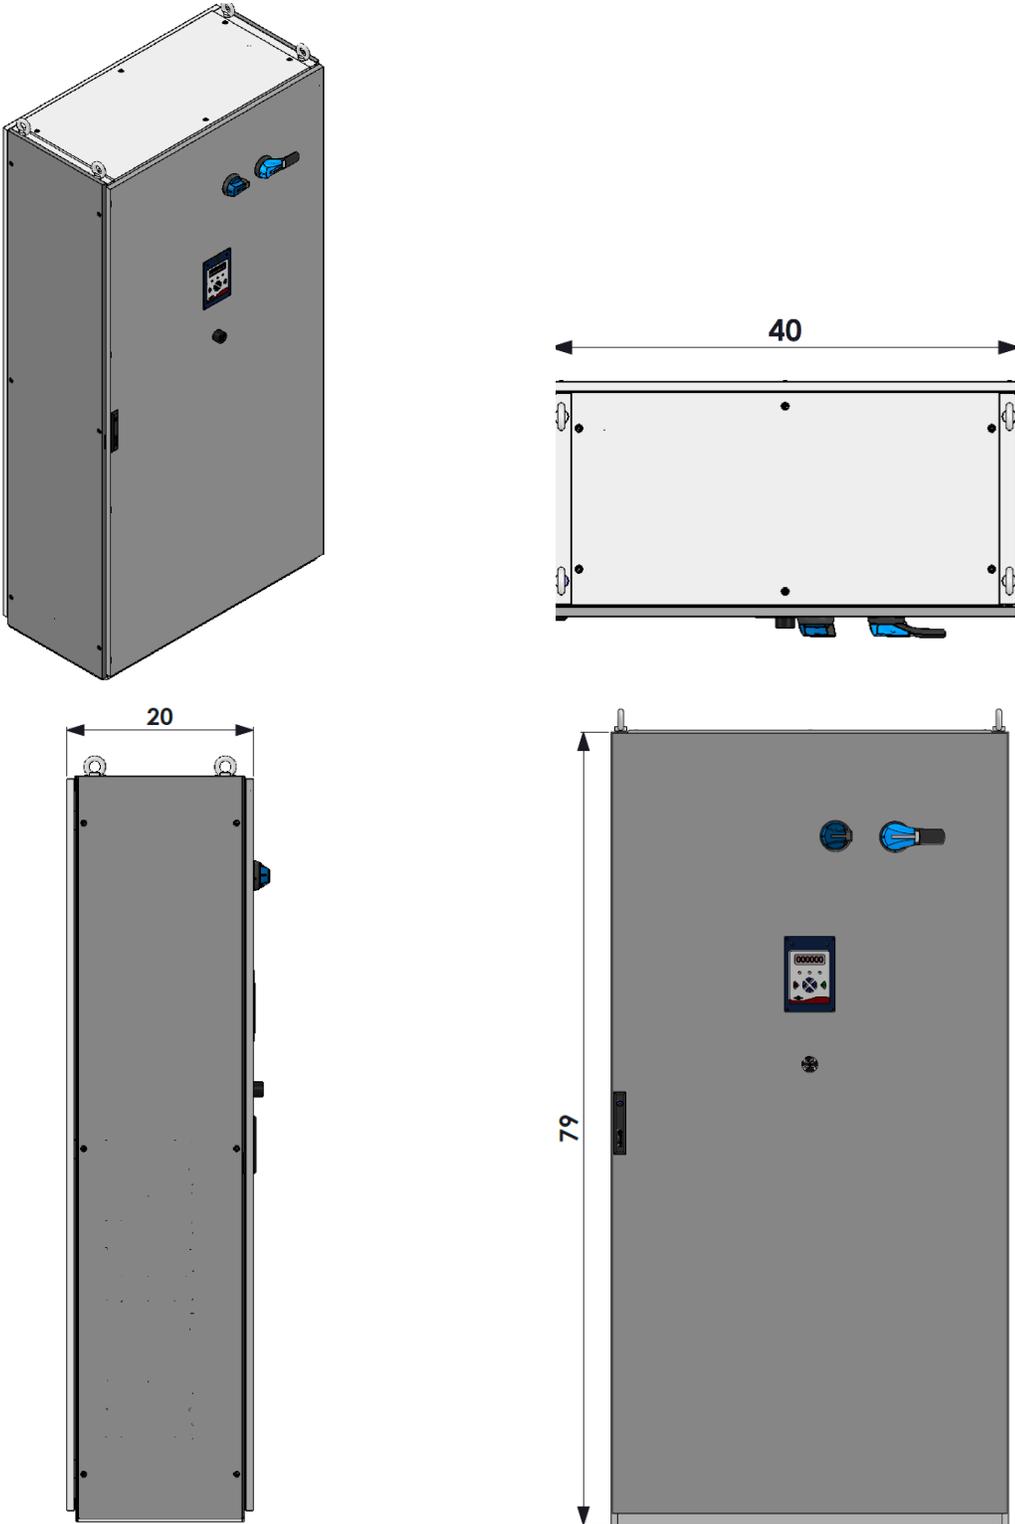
75KW-100KW Cabinet Dimensional Outline
